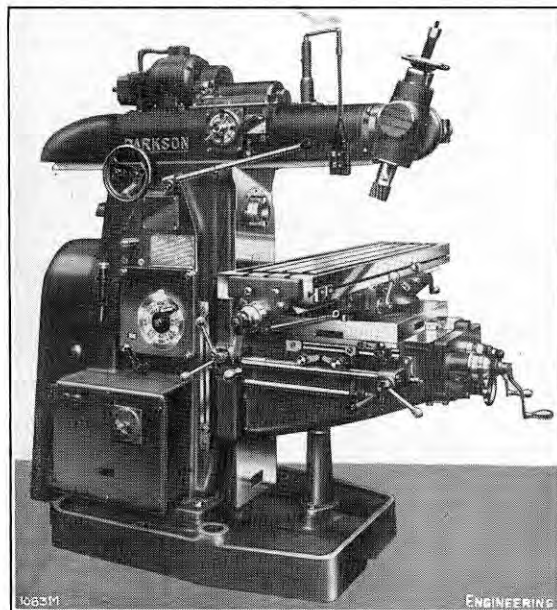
UNIVERSAL MILLER; J. PARKINSON & SON (SHIPLEY), LTD.
